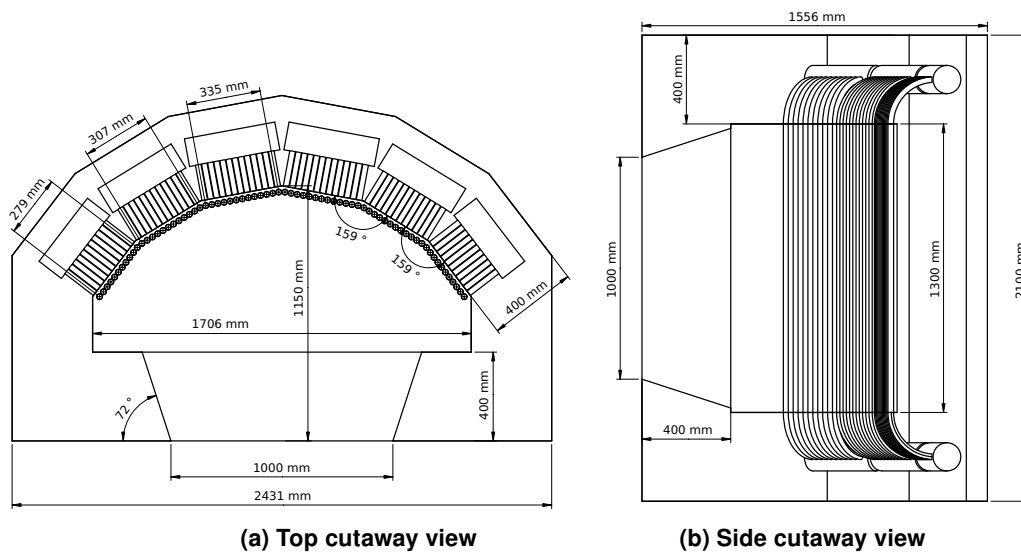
Drawings of the CSIRO 'Mark I' sodium receiver with key dimensions.
